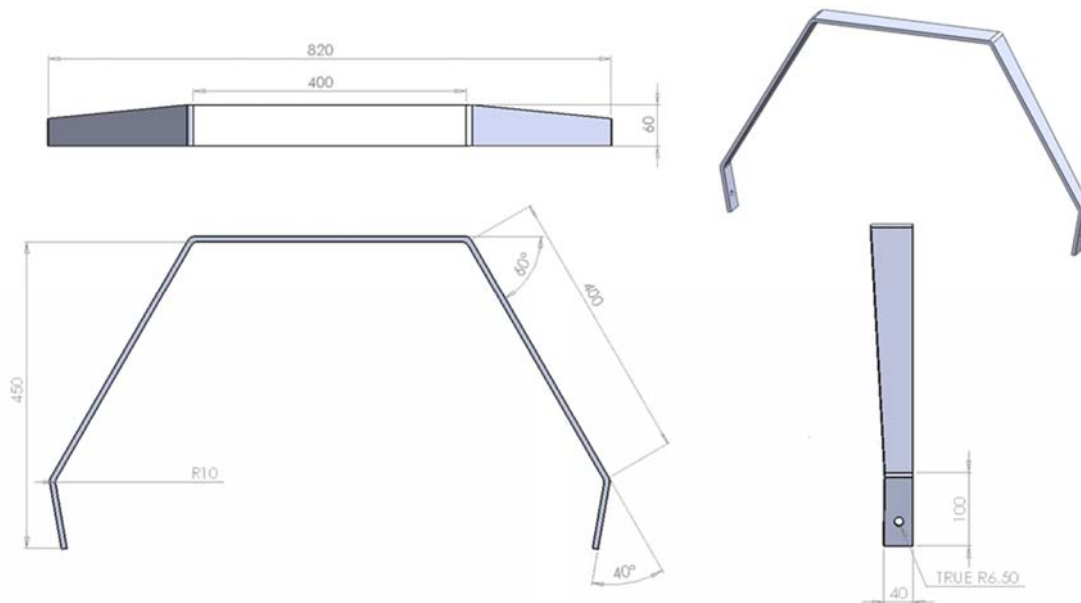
Geometry details of the landing gear (all dimensions are in millimeter)
